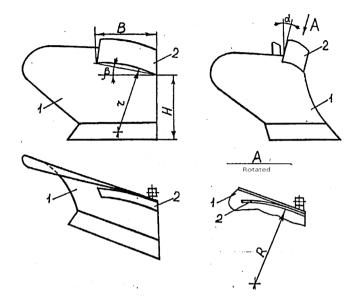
Plow body equipped with angle sensor:1-housing; 2-corner image.
